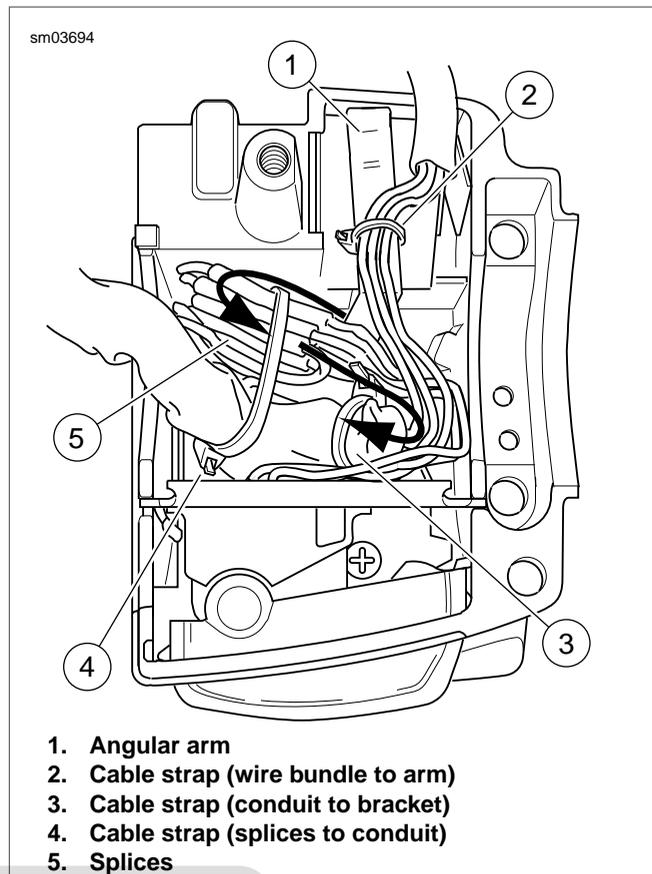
Mode Select Handlebar Switch Housing (Lower Right) - Classic/Ultra Models
